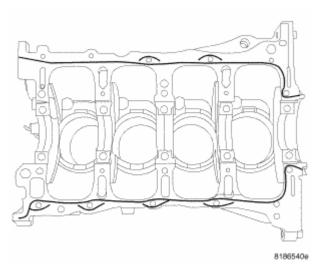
SEALING LADDER FRAME Courtesy of CHRYSLER LLC
